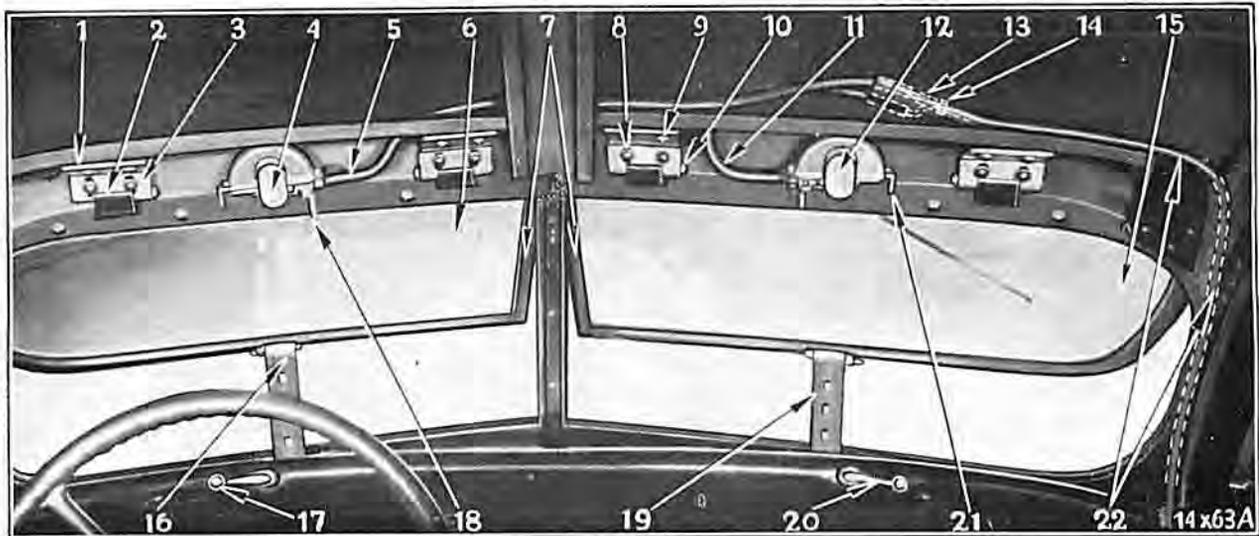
Complete Windshield Installation, with Trim Panels Removed
